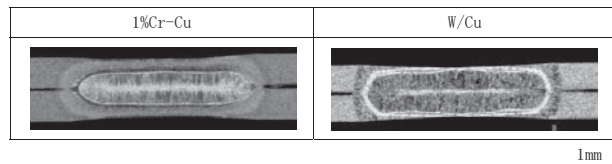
Cross section of weld using 1%Cr-Cu and W/Cu hybrid electrode for ZAM steel sheet. (After 1 point of weld)
